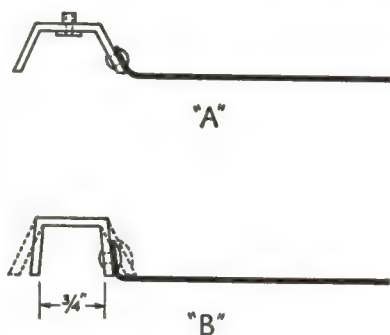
TV strap-type stand-off insulators "A", are modified by removing the threaded insert and by bending the assembly to the dimensions shown in "B"
